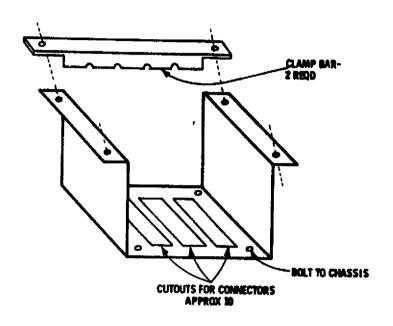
Circuit Card Edge Clamping Assembly
